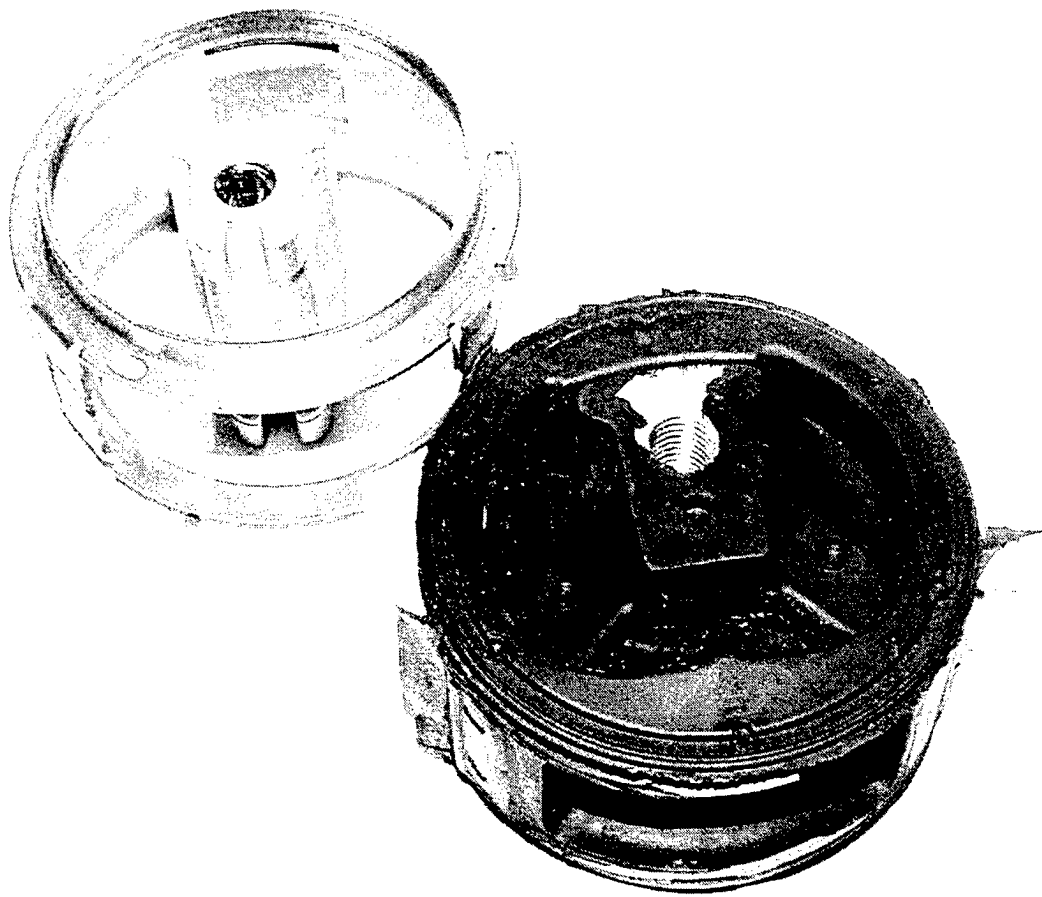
Rubber part vulcanized in a cast resin tool, inserts to be inmolded
